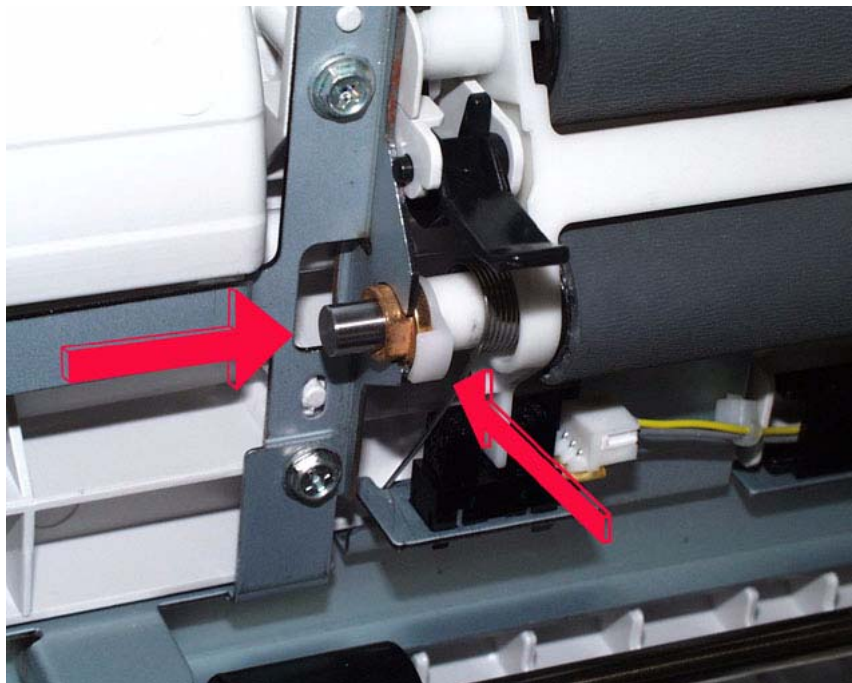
Installing the Feed Roll and Feed Roll shaft.
